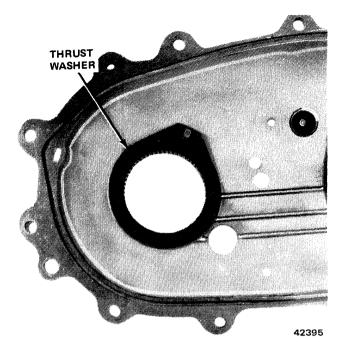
Drive Sprocket Thrust Washer in Position on Case Cover
